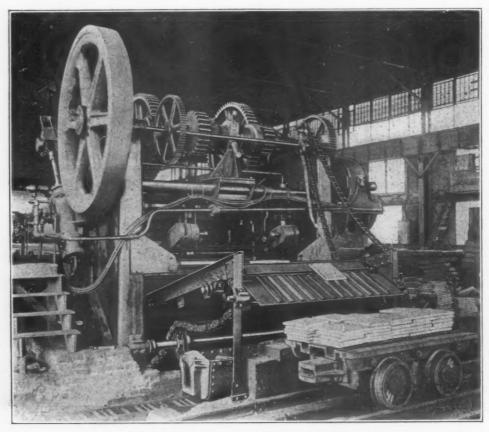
A Billet Conveyor Serving a Shear, Designed and Built by the Link-Belt Company.
